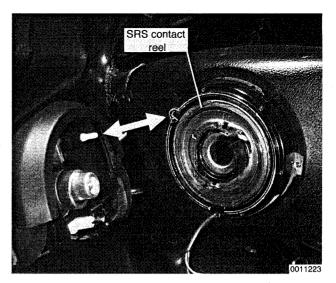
Install steering wheel so that locking pin in column aligns with cutout in contact reel (arrow). Contact reel on late model steering wheel may vary from that shown.
